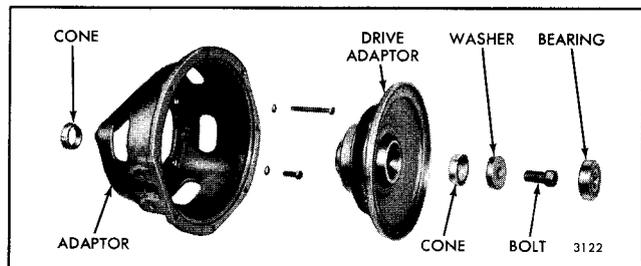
Front Power Take-Off Adaptor and Drive Details and Relative Location of Parts
